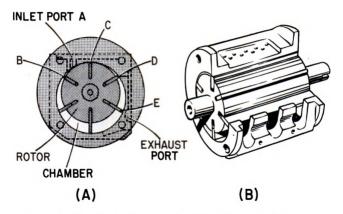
Air, motor: schematic and cutaway drawings.
